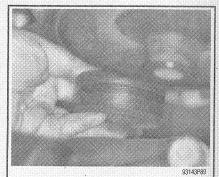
Retaining the idler pulley on this engine is the single bolt through the center
